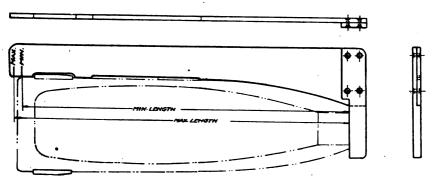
Sketch showing type of gauge used to inspect total length and profile of shell.
